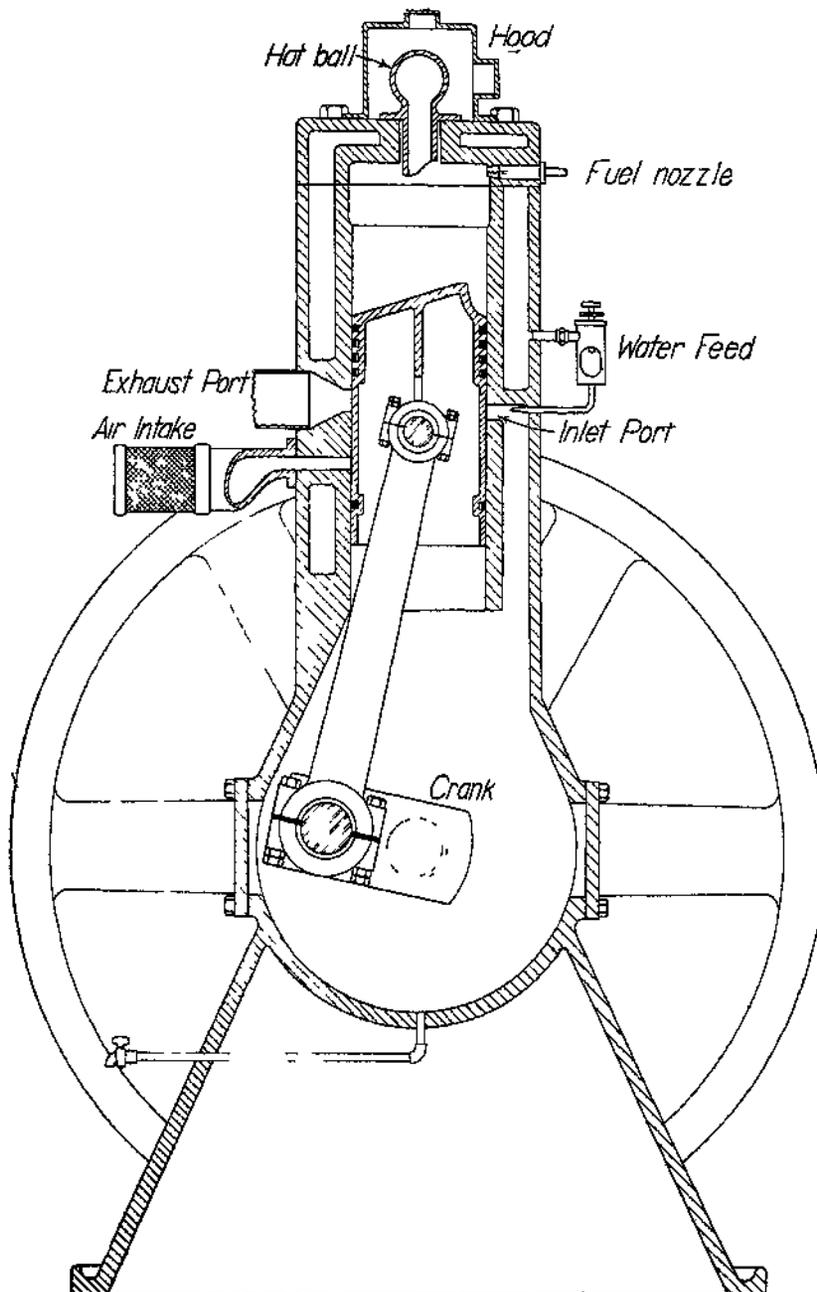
Sectional elevation of a vertical hot-ball engine, showing the hot ball, the fuel nozzle, the air intake, the enclosed crank case, the inlet port to the cylinder, the exhaust port, and adjustable water feed into the air charge.
